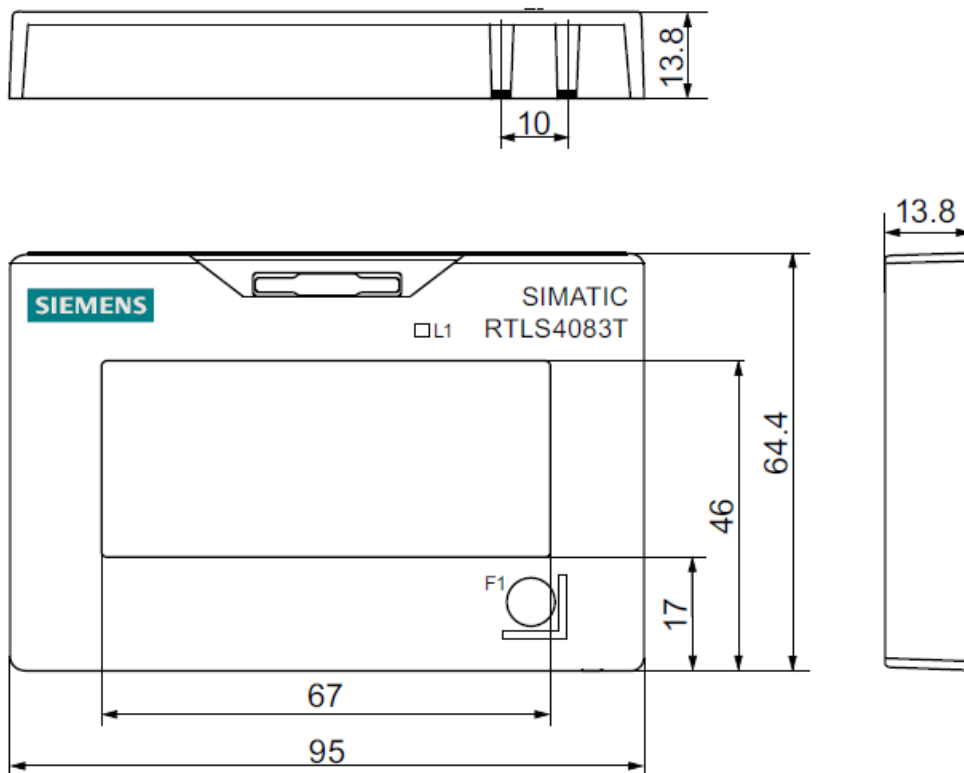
Dimension drawing of SIMATIC RTLS4083T - All dimensions are given in millimeters
